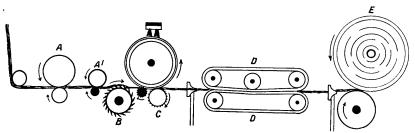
A.—Enlarged View of principal parts in a French Drawing-box.
